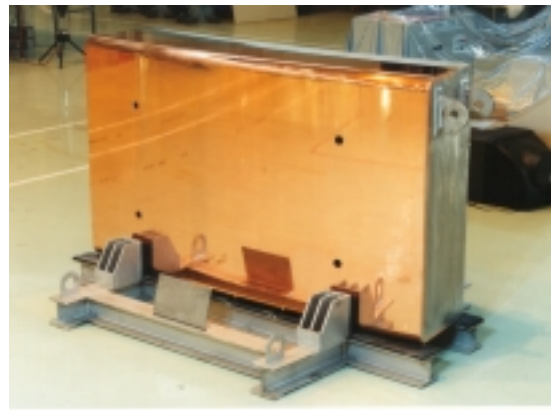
EUHT powder HIP module destructive examin. FIG. 4 JAHT blanket prototype completed
